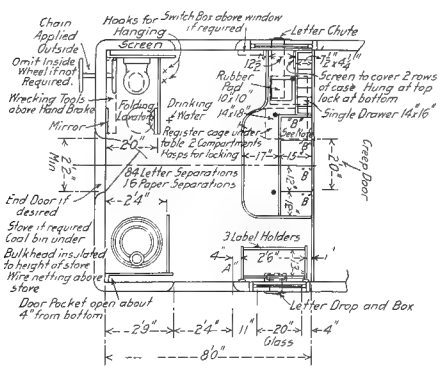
Floor Plan of 8 ft. Mail Apartment.
